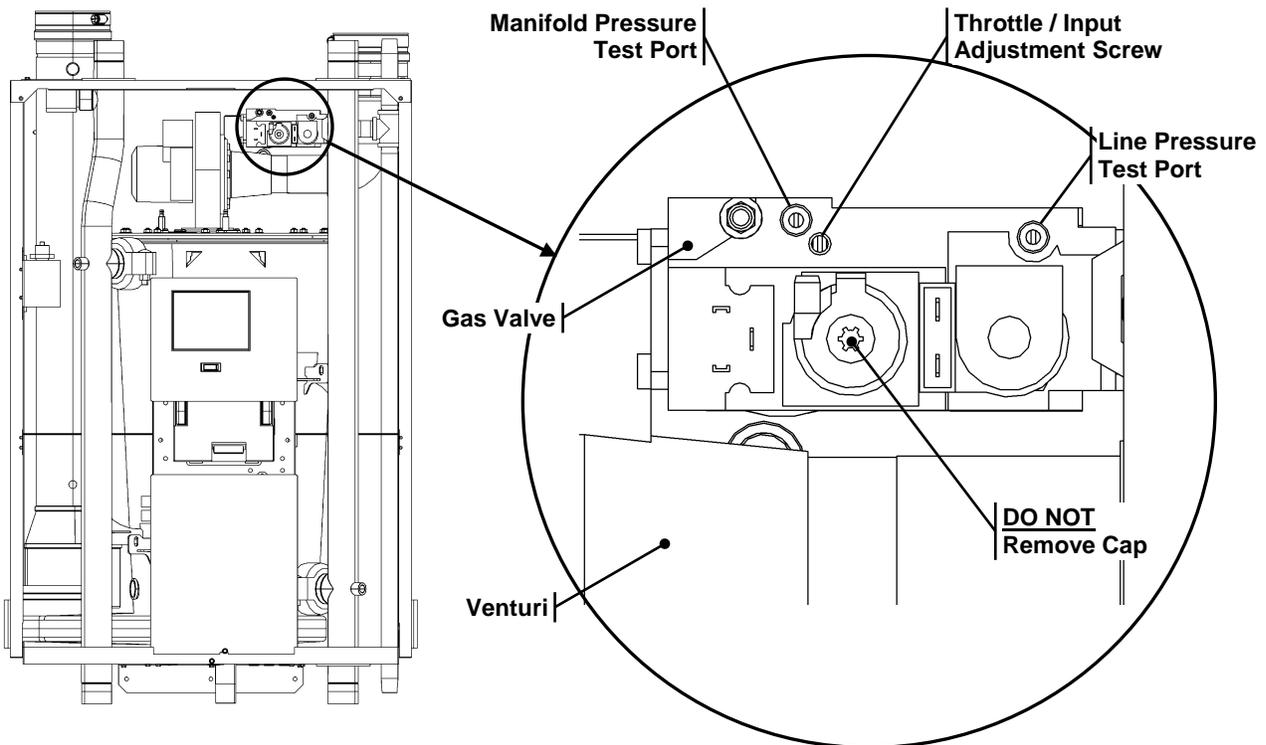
Tft300-399 Gas Valve and Venturi Assembly
